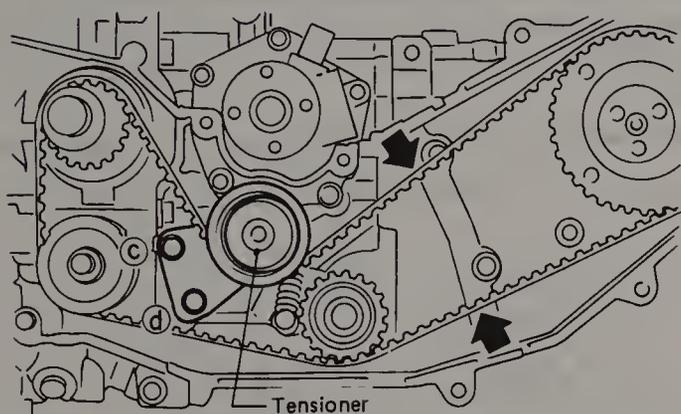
Install the belt over the camshaft sprocket, oil pump sprocket, idler and camshaft sprocket, then check to be sure the tensioner works by squeezing the belt runs together at the points indicated by the arrows (Sec 4)
